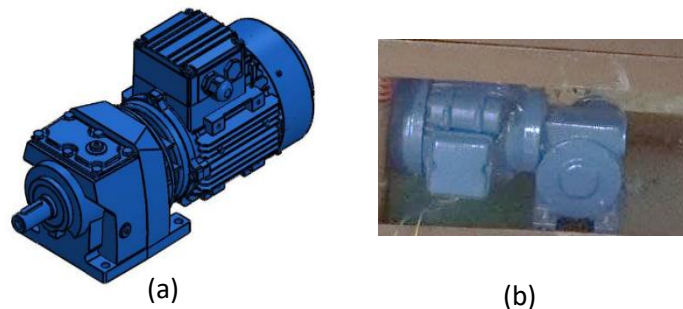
a) Sketch of the motor in SOLIDWORKS program b) Duplicated picture of the motor and gearbox
